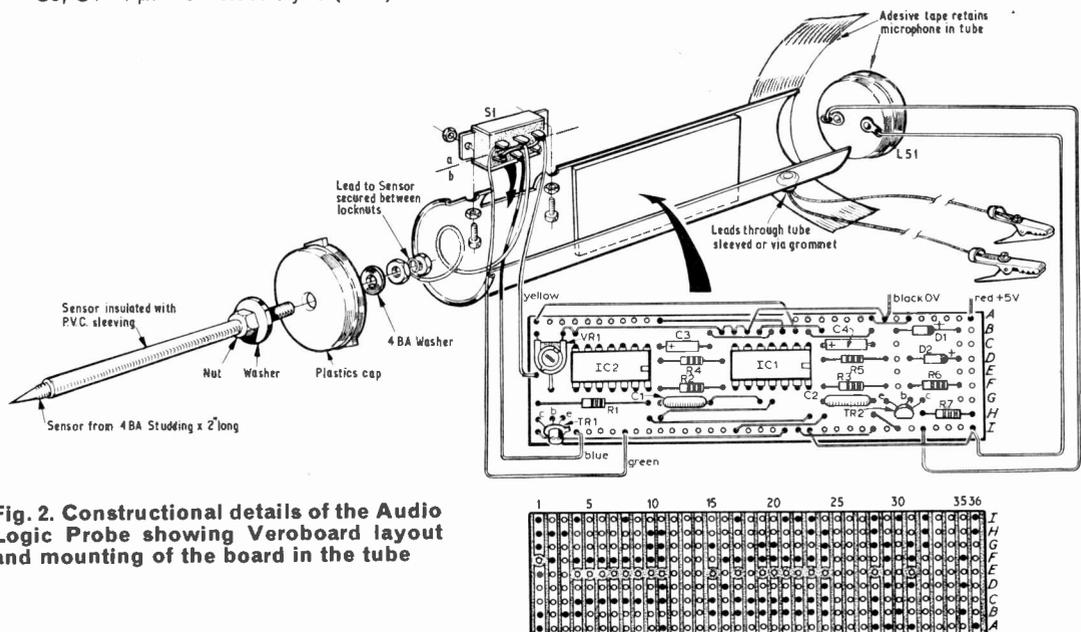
Constructional details of the Audio Logic Probe showing Veroboard layout and mounting of the board in the tube
